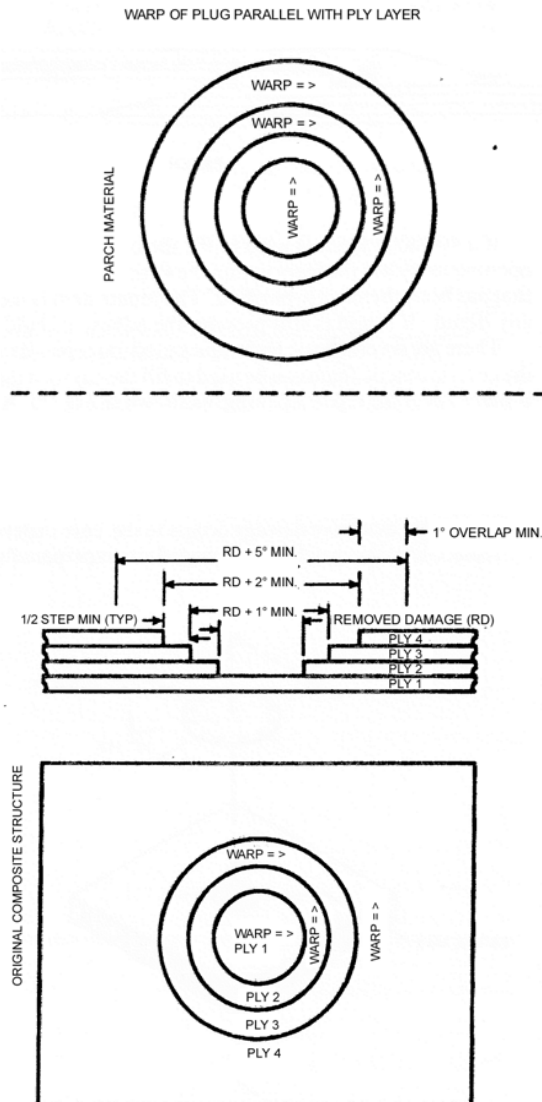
, Layout of a three-layer cut-back composite repair.
